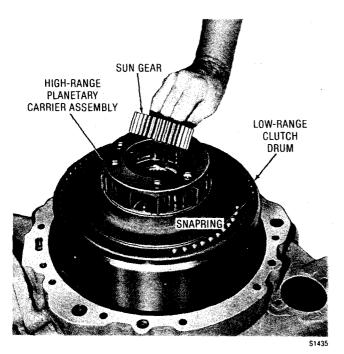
Removing high-range planetary sun gear (TRT 2221-3, 2421-3 with overdrive)
